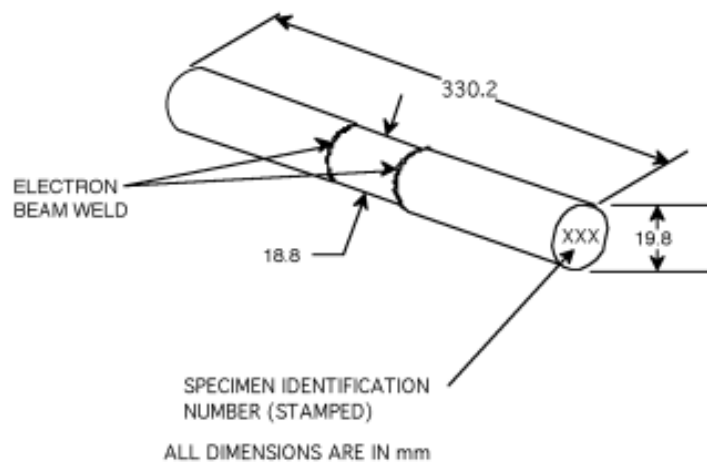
Schematic diagram of electron-beam-welded bar for machining A302-Gr B fatigue test specimens
